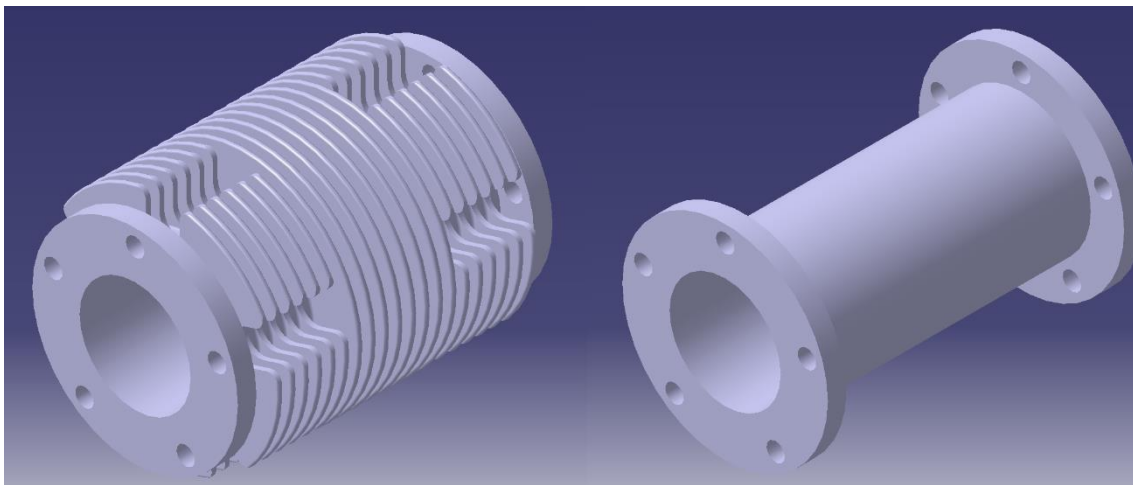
Two views of the cylinder design with (left) and without (right) cooling fins.
